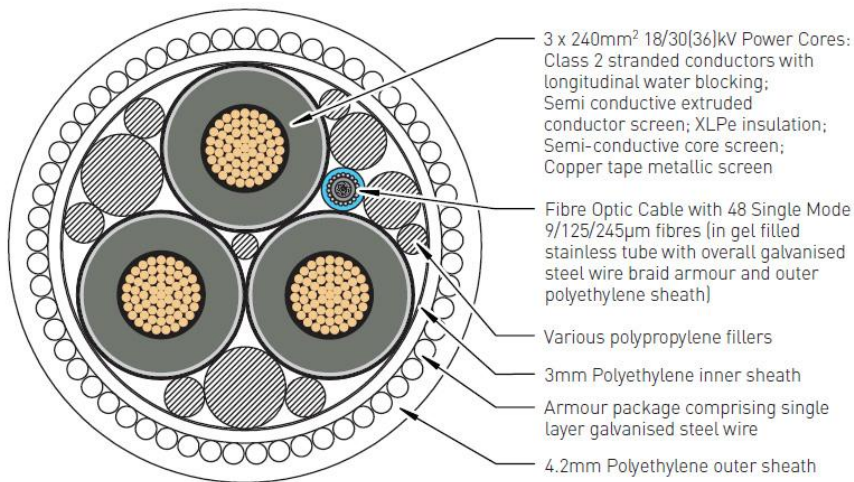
Typical construction of 36kV subsea array cable (courtesy JDR Cable Systems).
